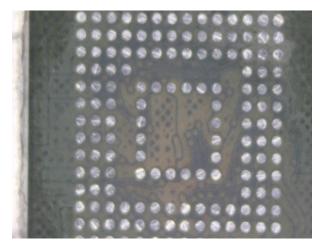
Example of BGA package under microscope that was removed by the lap and polish process
